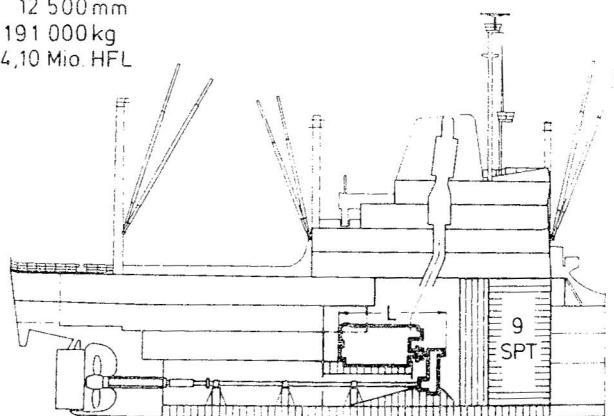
Conventional arrangement of the medium speed diesel main engine(s)—one motor reversed
